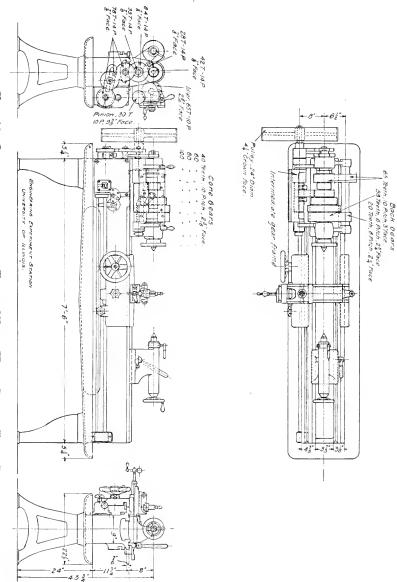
Lathe used in the Tests With High-Speed Tool Steels
